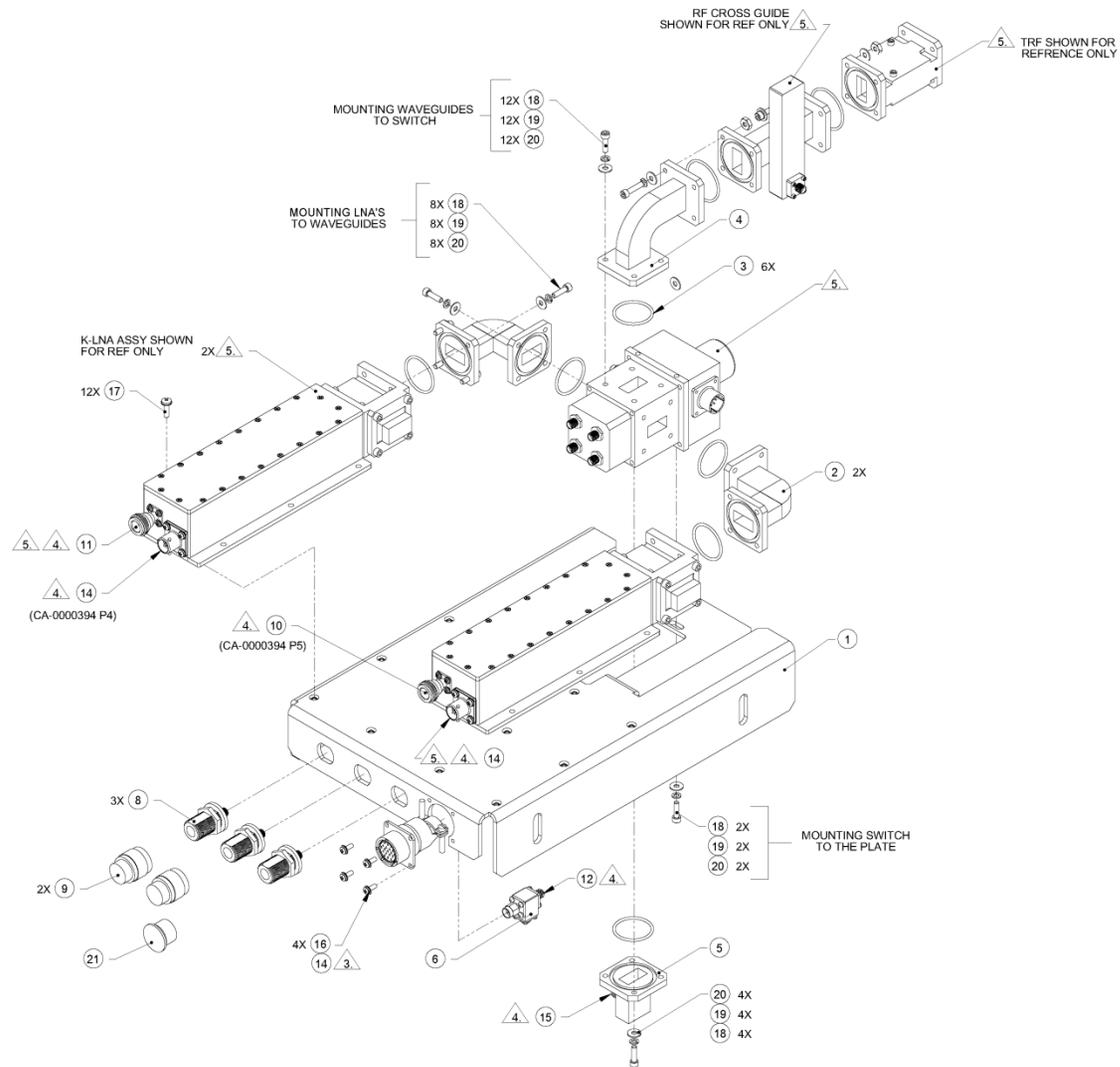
Ku-Band LNA 1:1 Redundant System (Exploded View)
